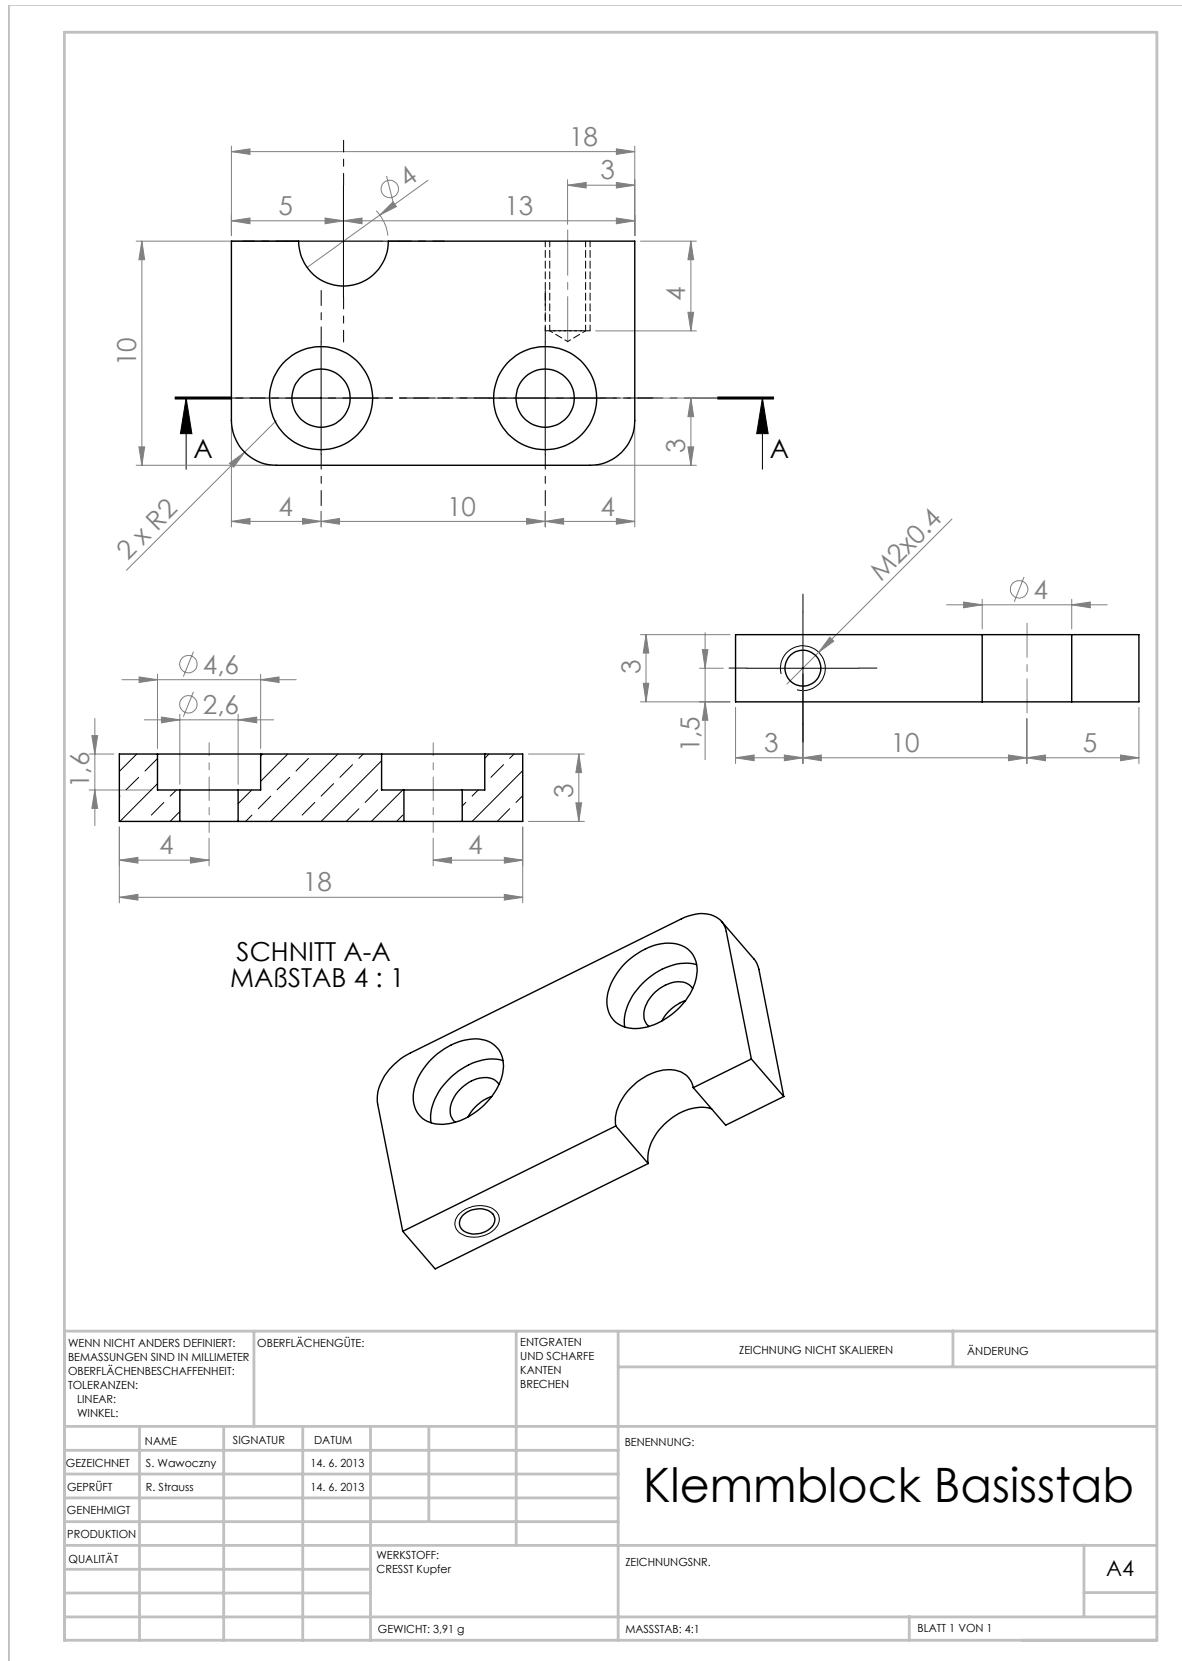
Technical drawing of the additional piece of copper holding the bottom CaWO_4 stick (called “Klemmblock”). It is embedded in the “Basisring” and fixed by M2.5 screws.
